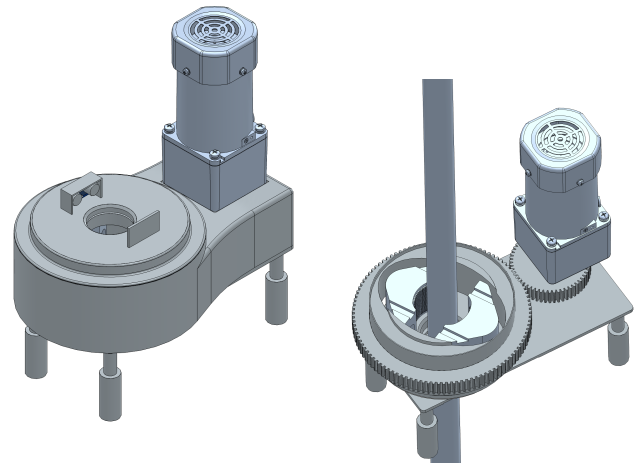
On The Left: Closed Detailed Design Of Raptor. On The Right: Open Detailed Design Of Raptor.
